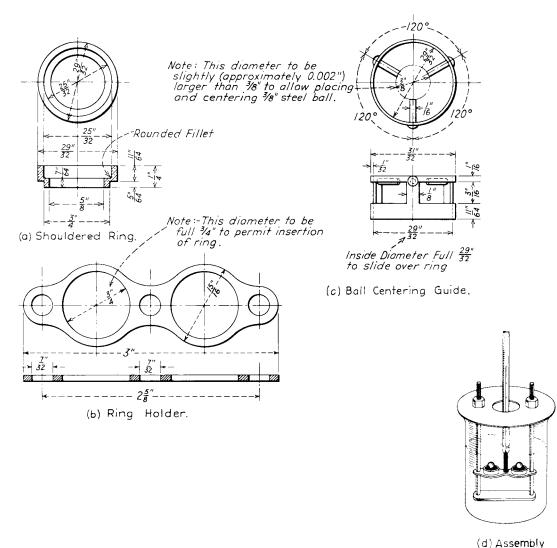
Shouldered Ring, Ring Holder, Ball-Centering Guide, and Assembly of Apparatus Showing Two Rings
